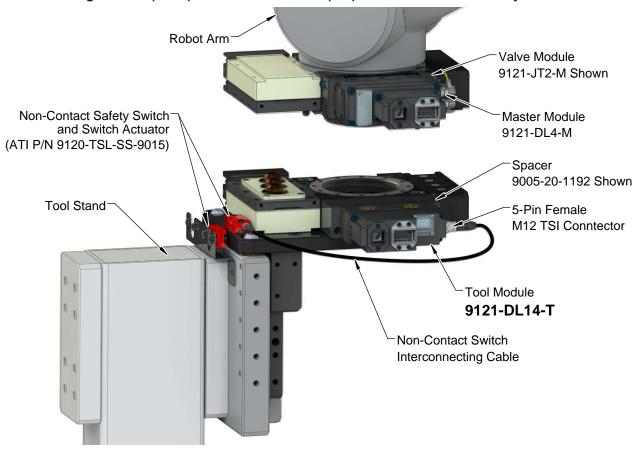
(DL14) Tool Stand Interlock (TSI) with a Contactless Safety Sensor
